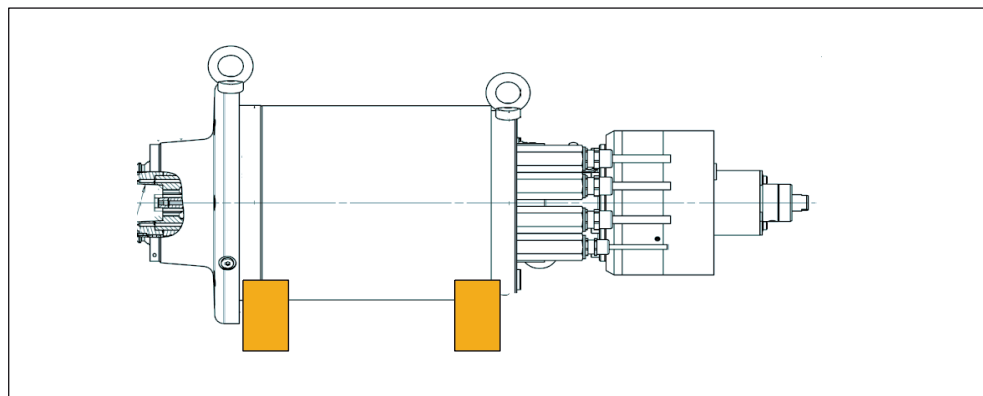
Locate the spindle on the wooden V-shaped blocks in a horizontal position
